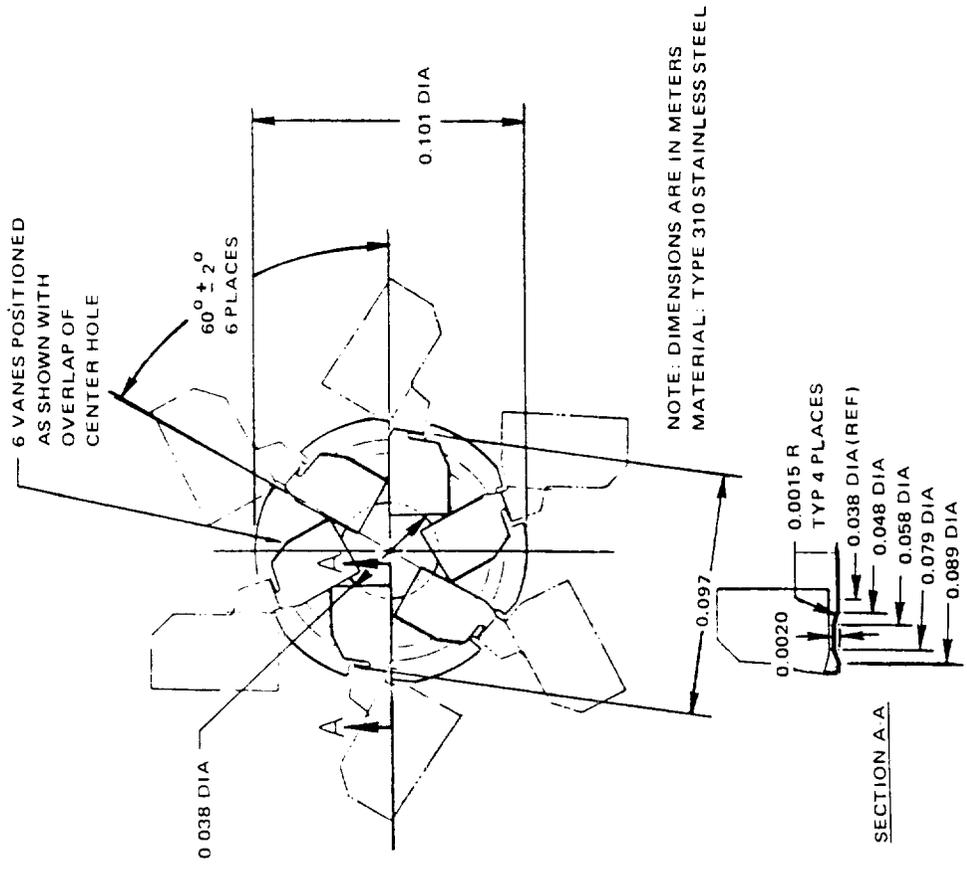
Stamped and Folded Sheet Stainless-Steel Optimum Head
